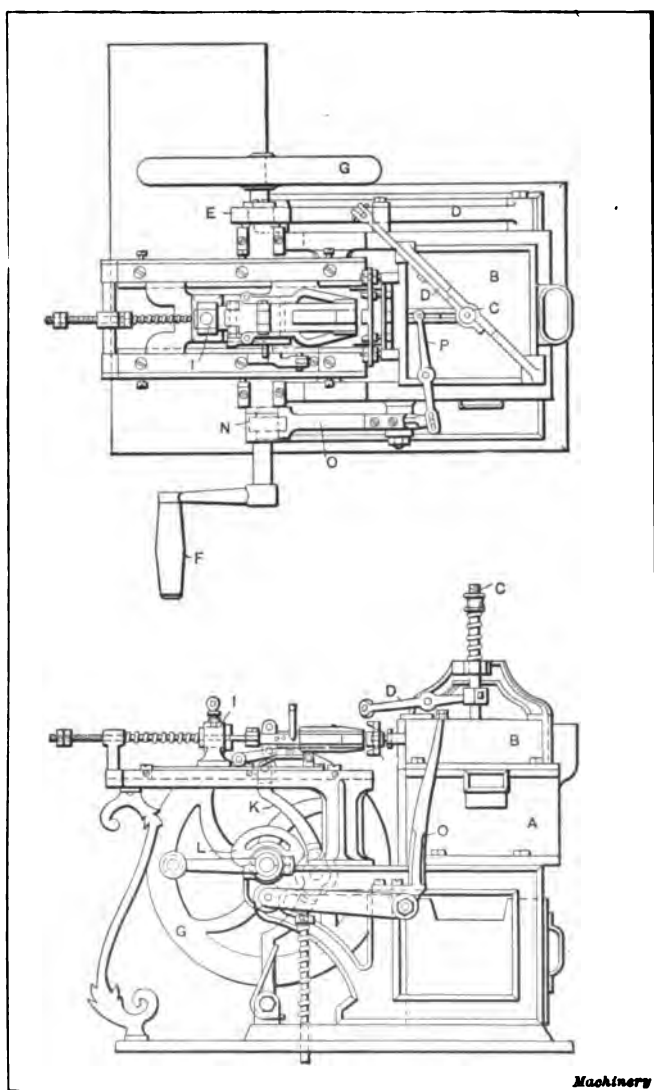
Plan View and Side Elevation of First Automatic Die-casting Machine
